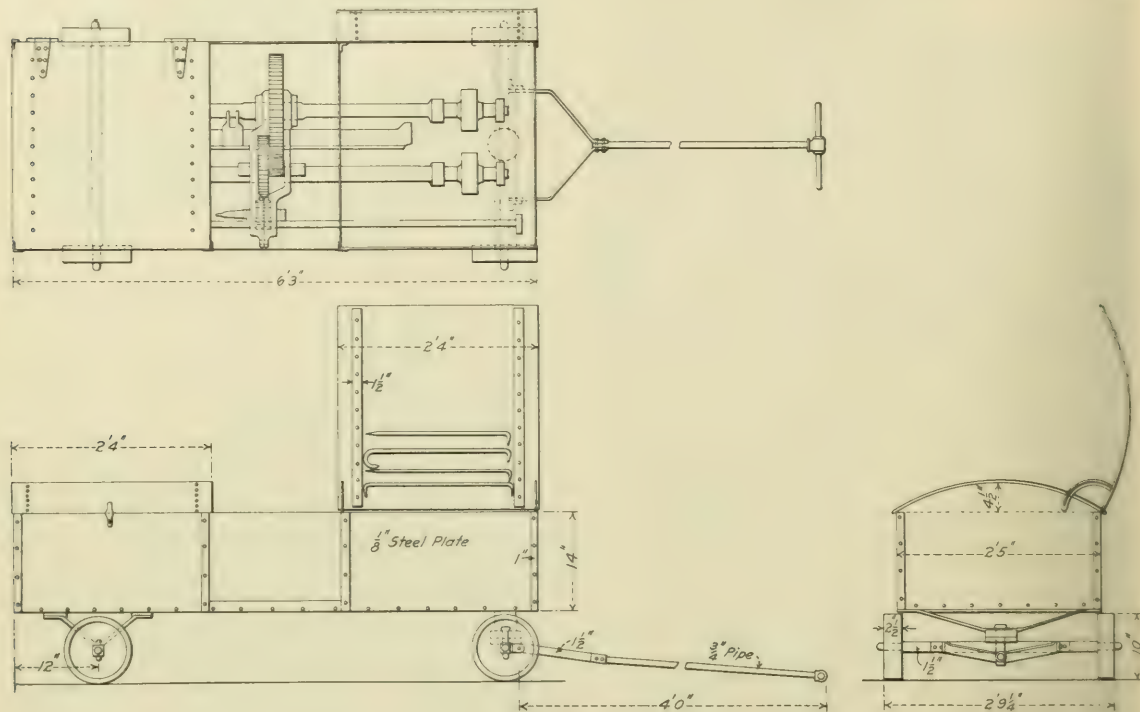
Portable Steel Box for Valve Setting Machine and Tools.
